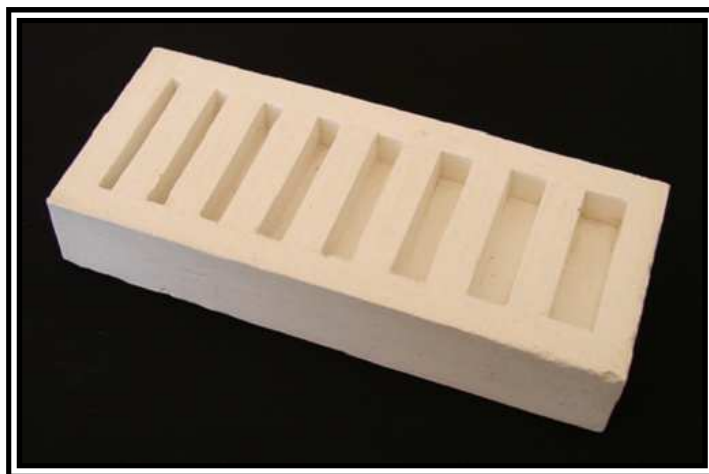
Test geometry 1 – re-test – plaster of Paris mould
